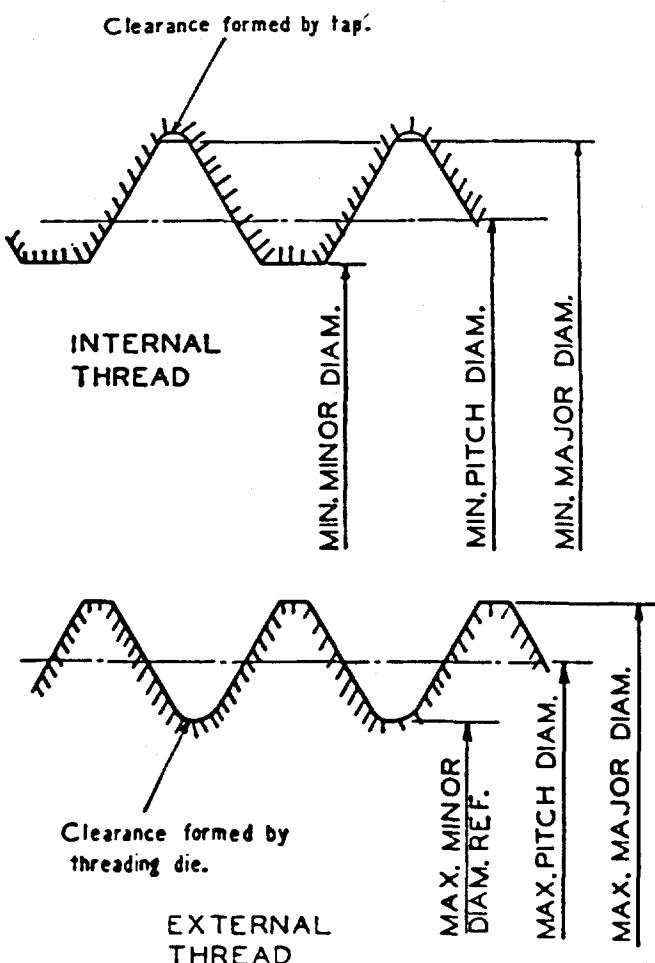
Thread dimensions to be determined for a special thread.
